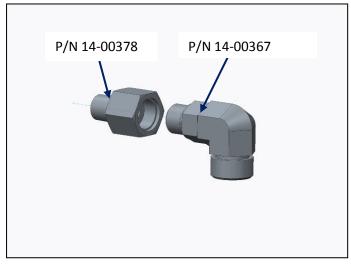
Installation of Supply Hose Assembly (Top View)
